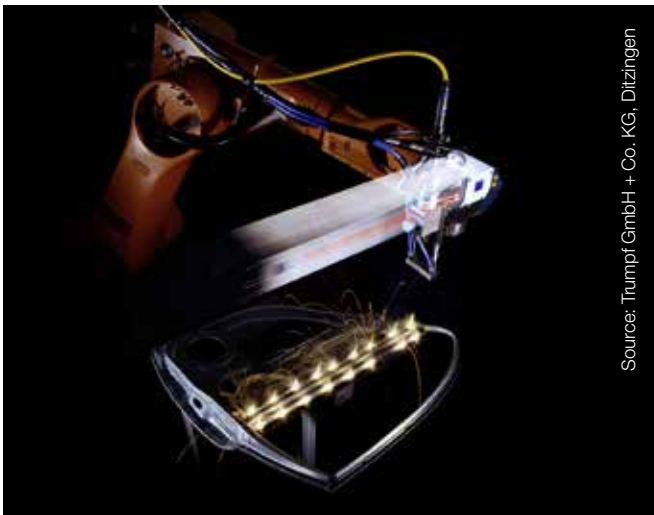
Scanner welding of a car door with a programmable focusing optic.
